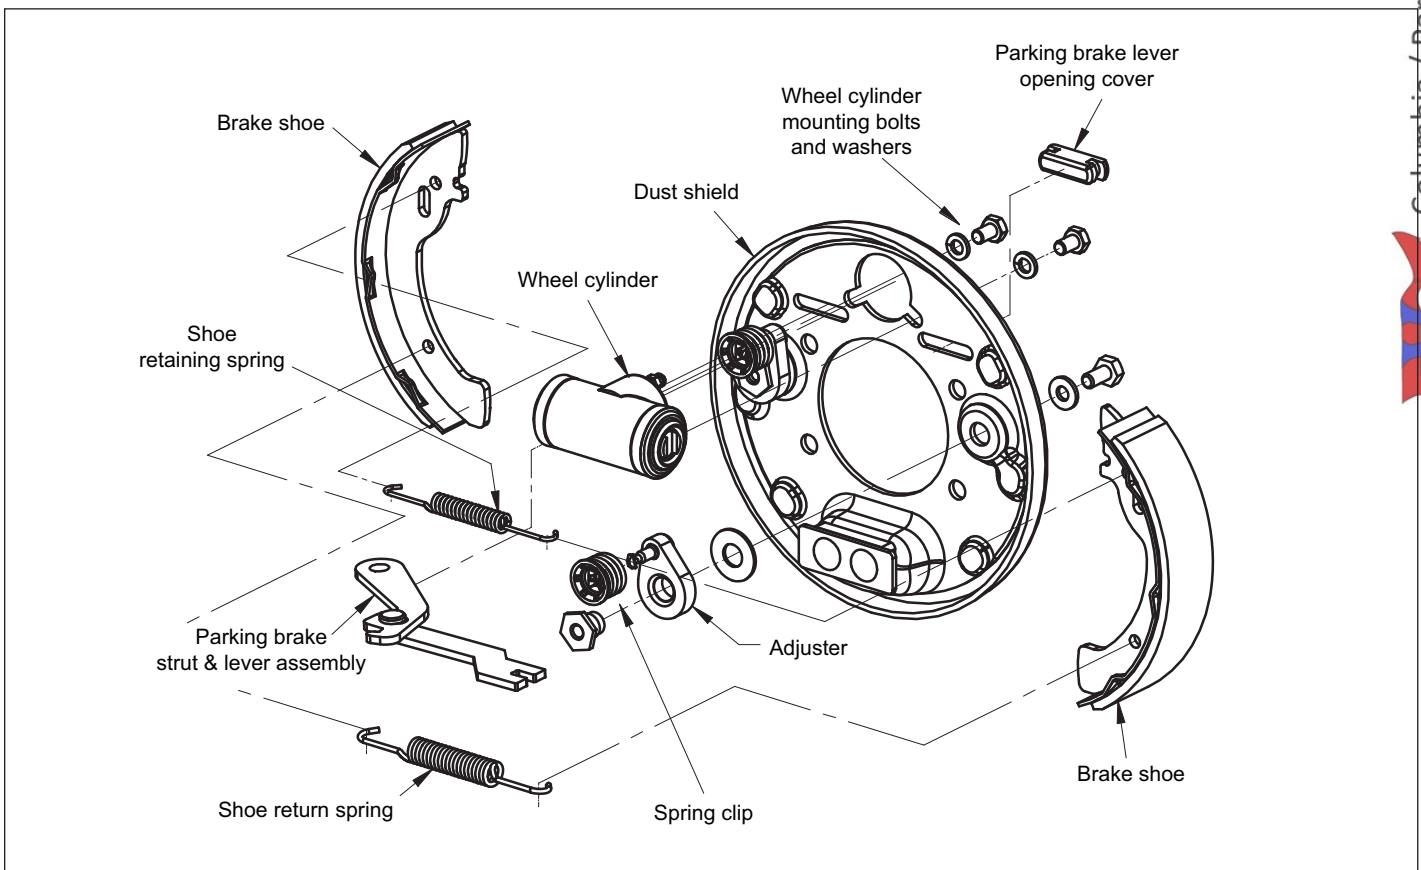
Rear Drum Brake Assembly - Dana Spicer Models
